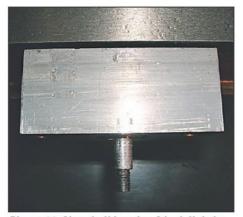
New ball bearing block lightly fitted to mill. Note constant width gap.
